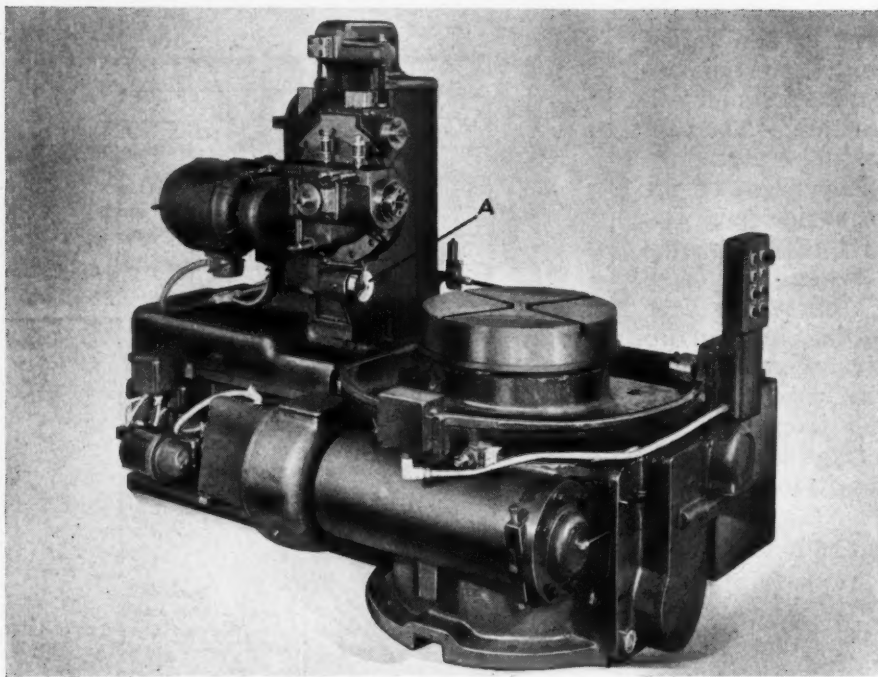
This Special-purpose Milling Machine for Contour Milling is Provided with an Electronic Table Feed Control to Give a Constant Rate of Feed at the Cutter by Varying the Table Feed through a Cam Mechanism
